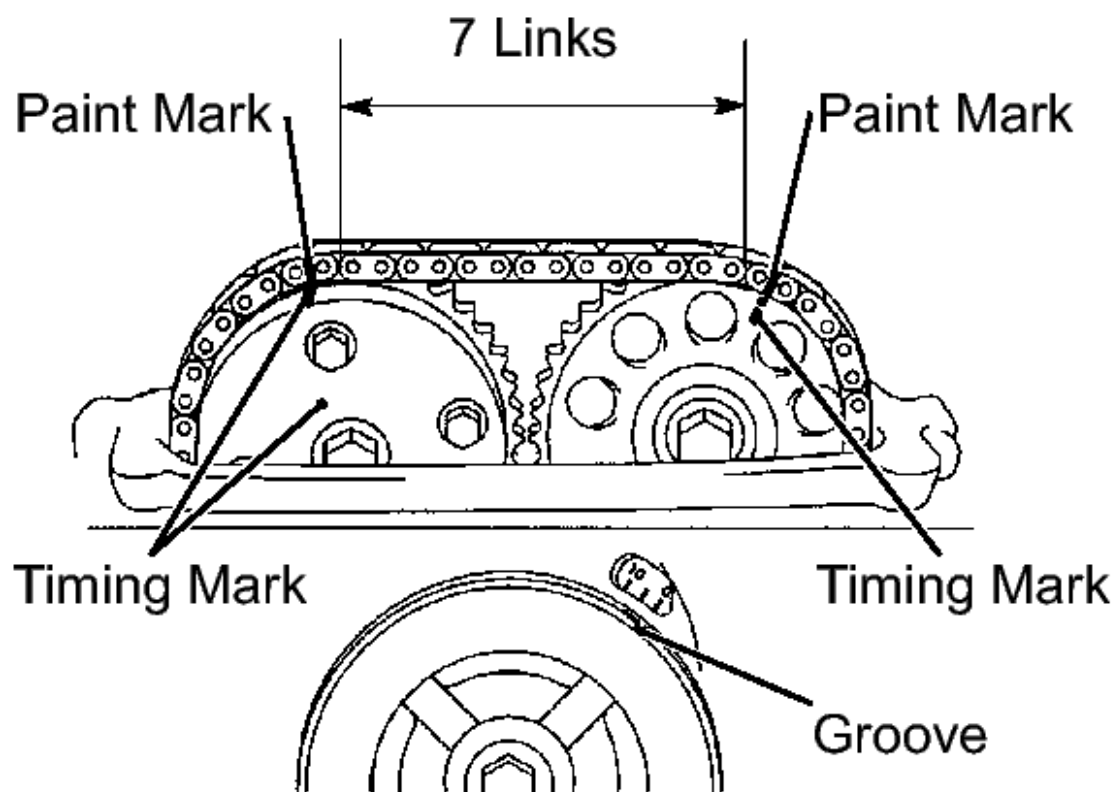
Aligning With Timing Marks On Camshaft Timing Gear And Camshaft Timing Sprocket
